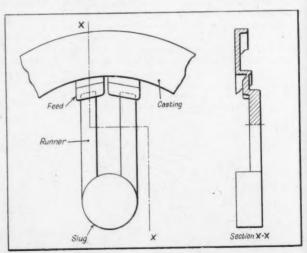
Paired runners and feeds are used for a larger ringshaped casting. Additional external overflows may be required with this arrangement
